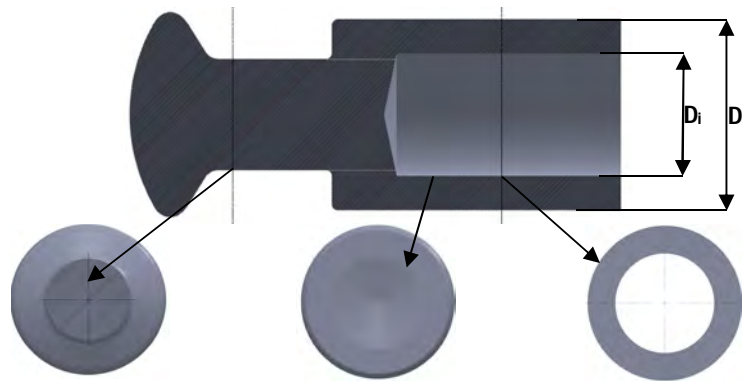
Critical cross-sections when dimensioning an end fitting [5]
